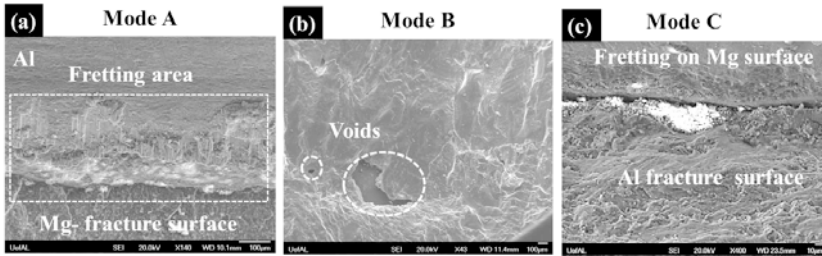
SEM images of (a) Fretting on Aluminum surface and magnesium fracture surface in Mode A (b) Voids in weld nugget in Mode B (c) Fretting on magnesium surface and aluminum fracture surface in Mode C.
